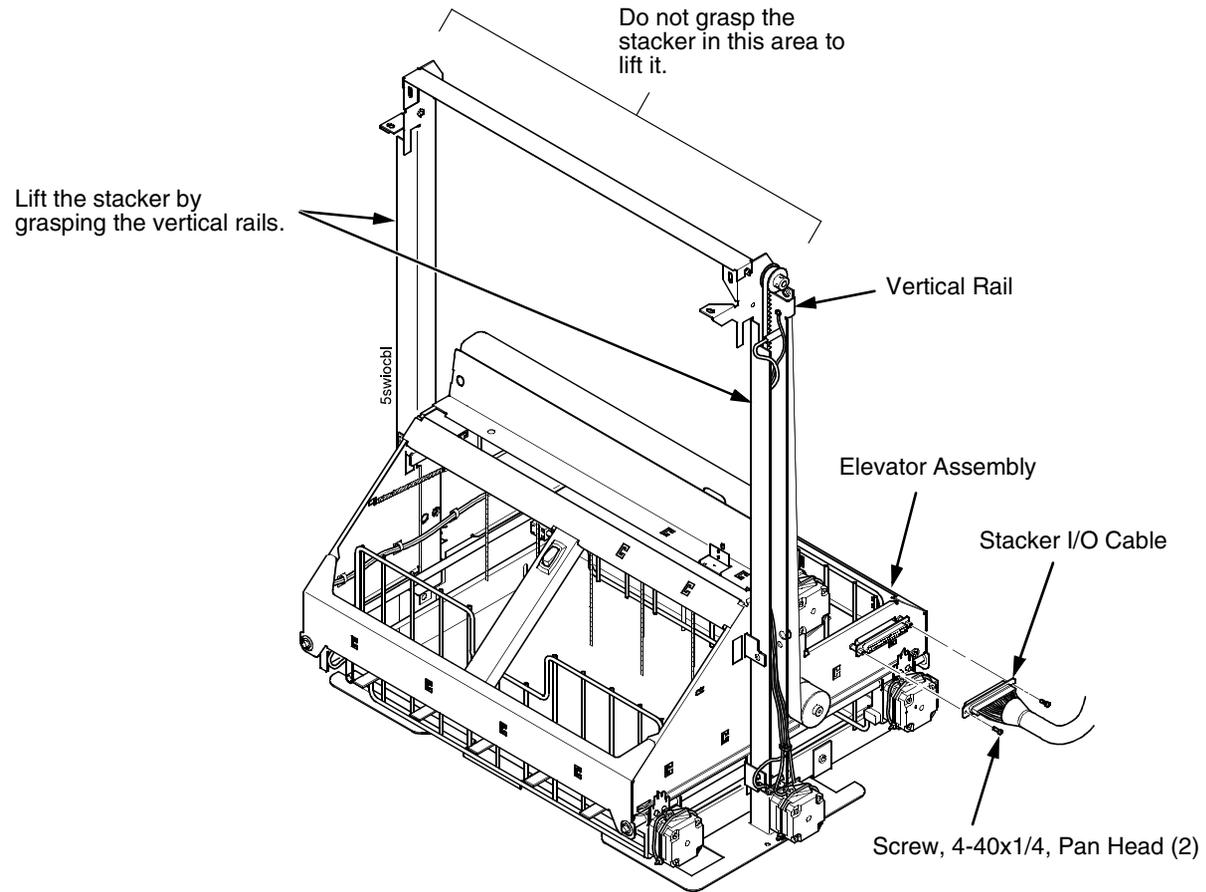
This figure shows which screws to remove to prepare the stacker for removal from the cabinet.
